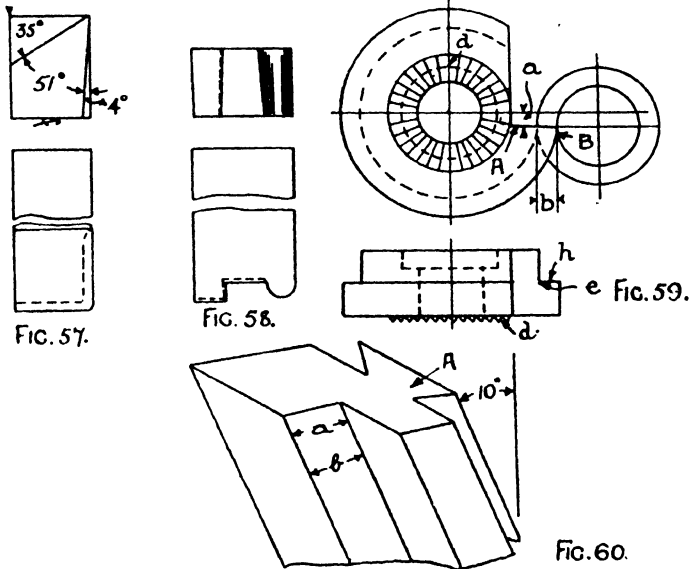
FORM OF CUTTER GENERALLY USED IN BOX TOOL HOLDERS.
